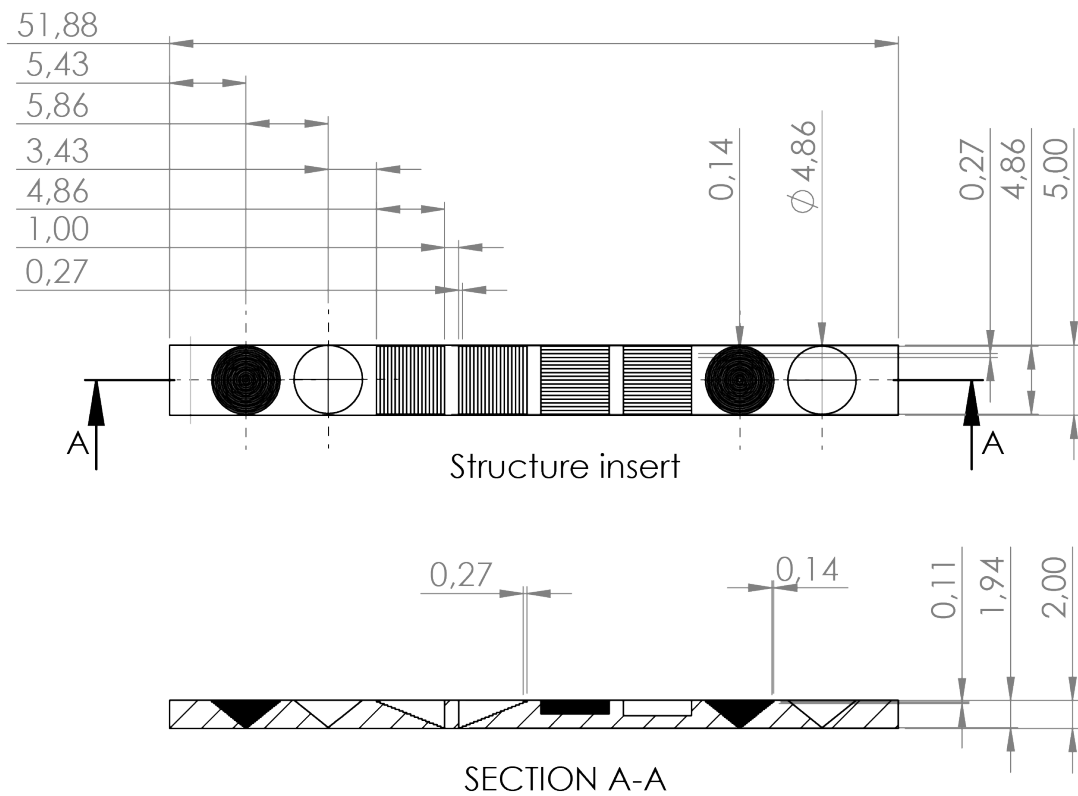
Drawing of the structure insert placed in the bottom part of the mould used in the degradation experiment. Note that this part was assembled to the bottom mould part within Solidworks, converted to a parasolid and printed together as one structure. Dimensions are in millimeters (mm).
